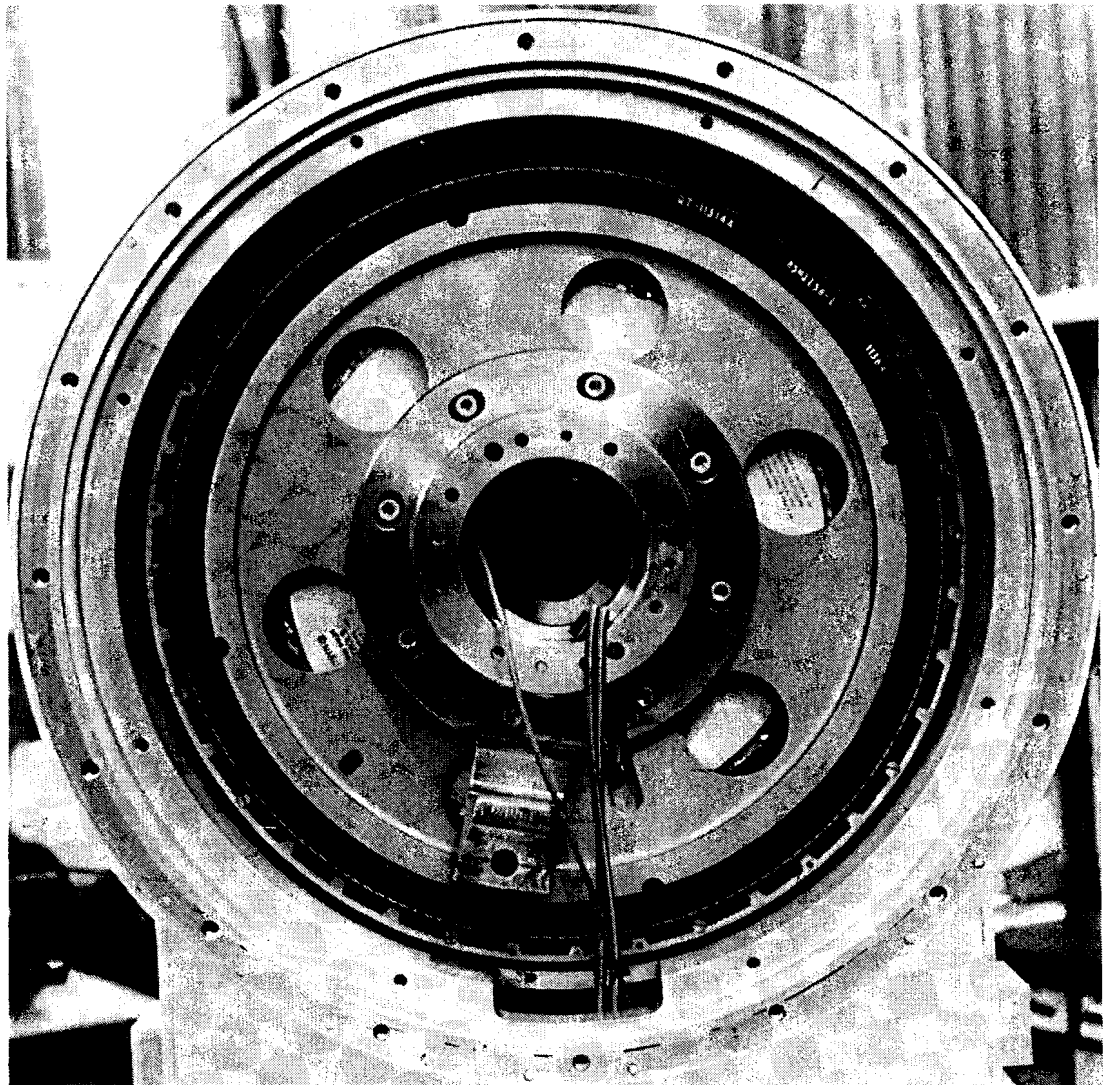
GPEOD ELEVATION DRIVE BEFORE ASSEMBLY OF THE BRUSH GEAR. THE INDUCTOSYN ROTOR CAN BE SEEN THROUGH THE HOLES IN THE MOTOR SPIDER. NOTE THAT THE MAIN ROTOR IS MOUNTED DIRECTLY ON THE TRUNNION
